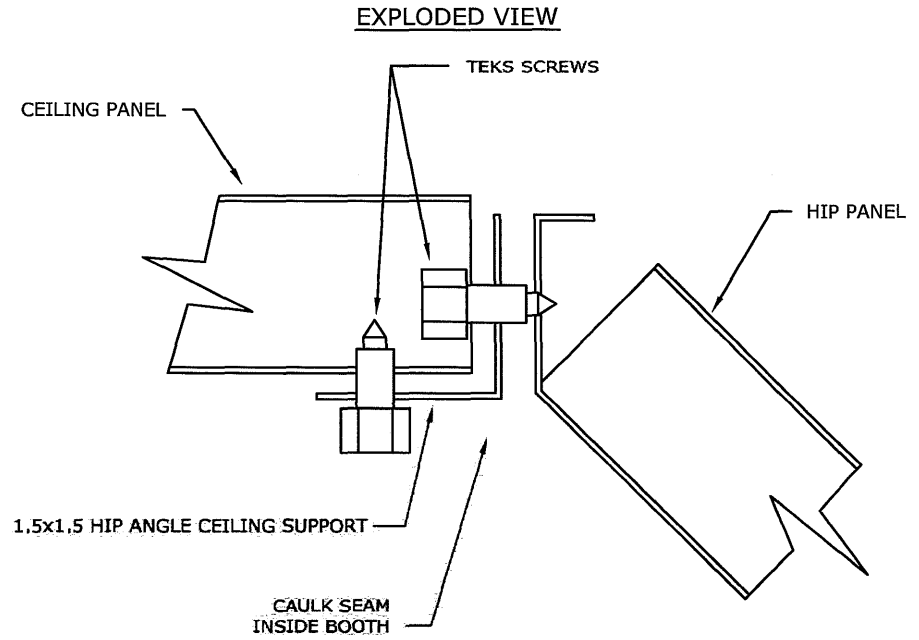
DETAIL TEKS SCREW AND ANCHOR INSTRUCTIONS
